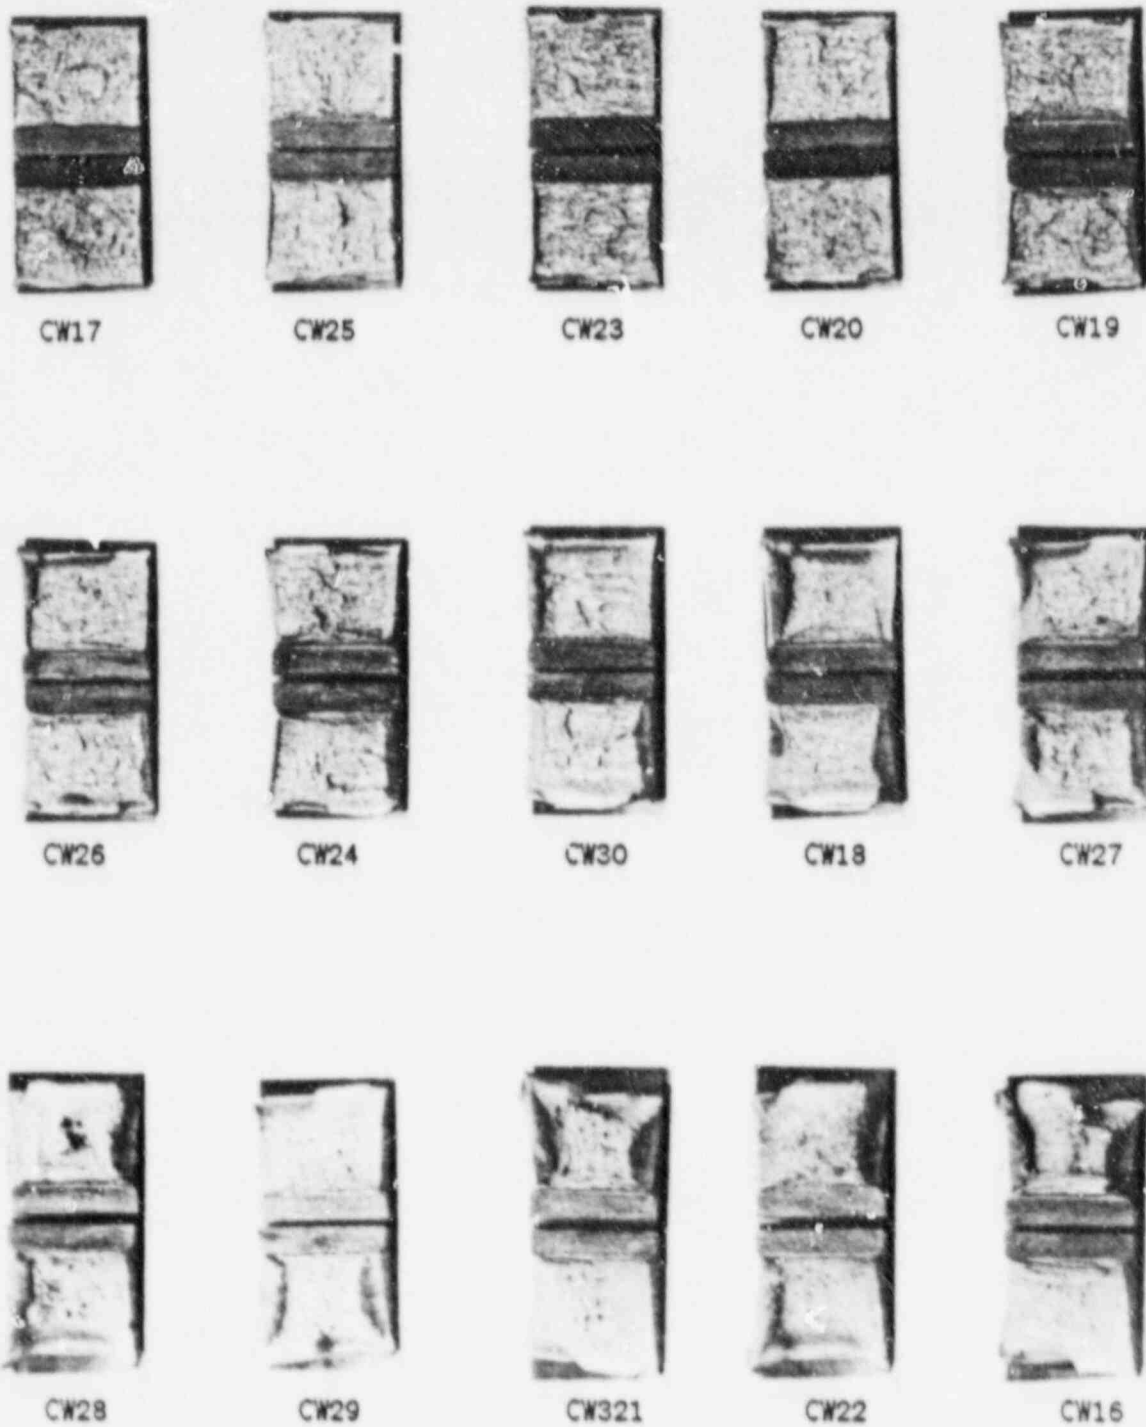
Charpy impact specimen fracture surfaces for V. C. Summer Unit 1 reactor vessel weld metal
